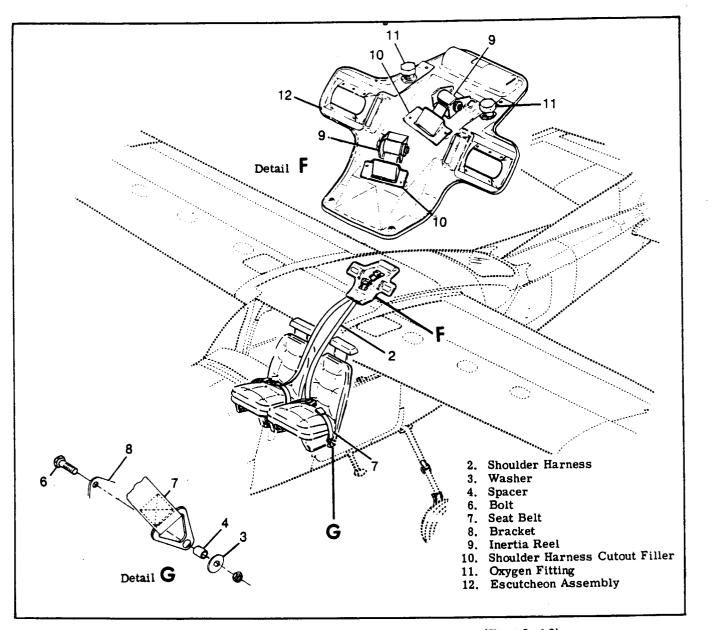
Seat Belt and Shoulder Harness Installation (Sheet 2 of 2).
